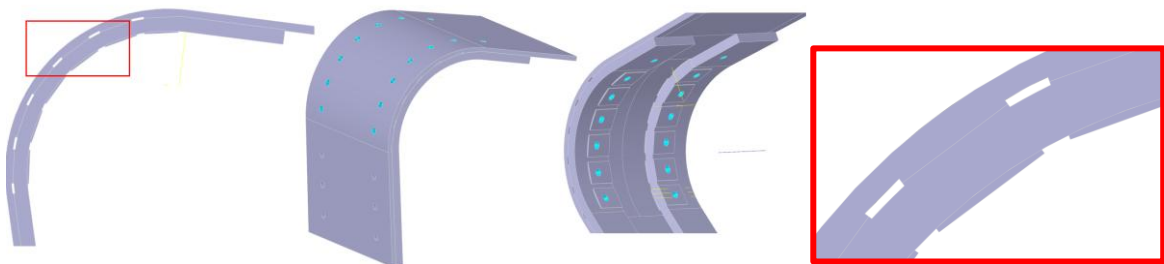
Faceted design for flange-back plates interfacing (figure shows the solution implemented on the OVT flange-back plate)
